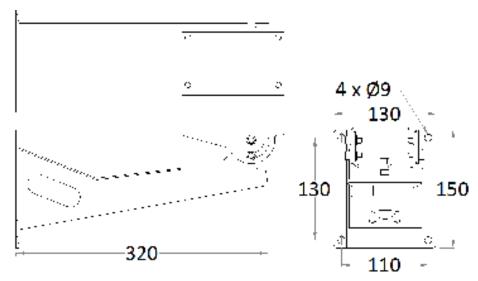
BFW32SW Swivel Joint & Pole Adaptor
